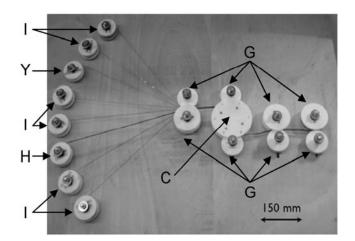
Winding machine for forming the multilayer switches. I indicates spools of insulation; H, spool of steel tape; Y, spool of YBCO tape; G, guides; C the coil. Friction brakes were mounted on each axle.
